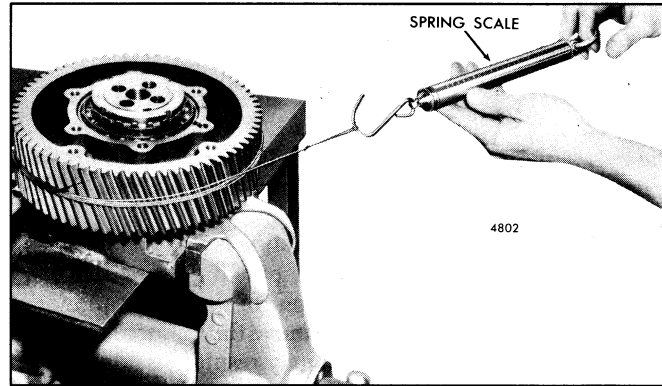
Checking Bearing Pre-Load with Spring Scale J 8129
